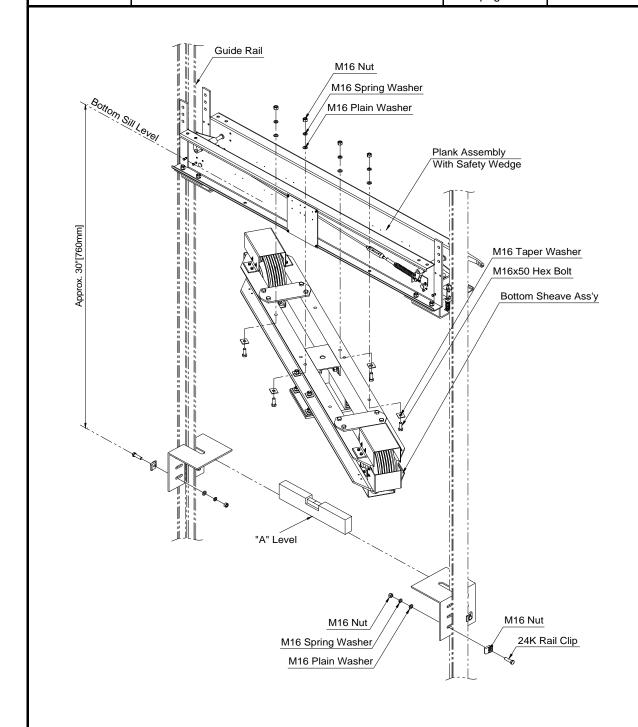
A. PLANK ASSEMBLY INSTALLATION (Underslung Skewed type)
